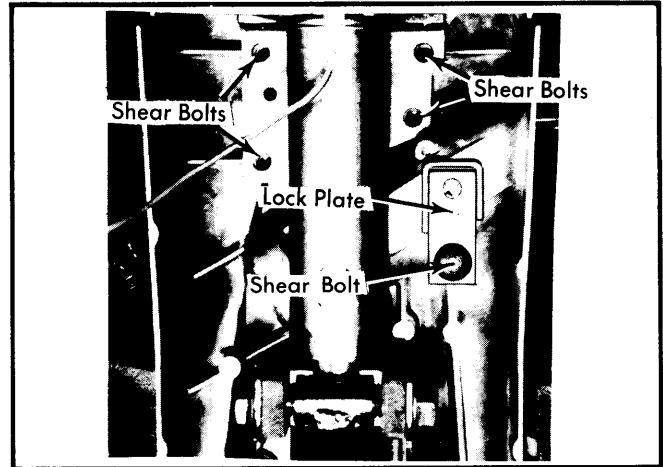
Location of Shear Bolts. View Looking Up From Under Steering Column. All Models Except 320i
